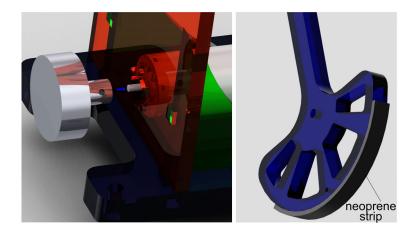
Left: After bolting the motor to the front plate, the drive wheel is secured to the shaft with a set screw (not shown). Right: a neoprene strip provides a reliable frictional contact with the drive wheel.
